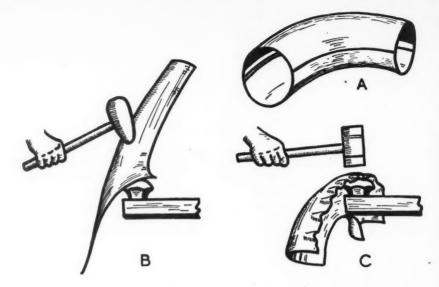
Drawing Illustrating Technique Employed in Beating a Pipe Bend
